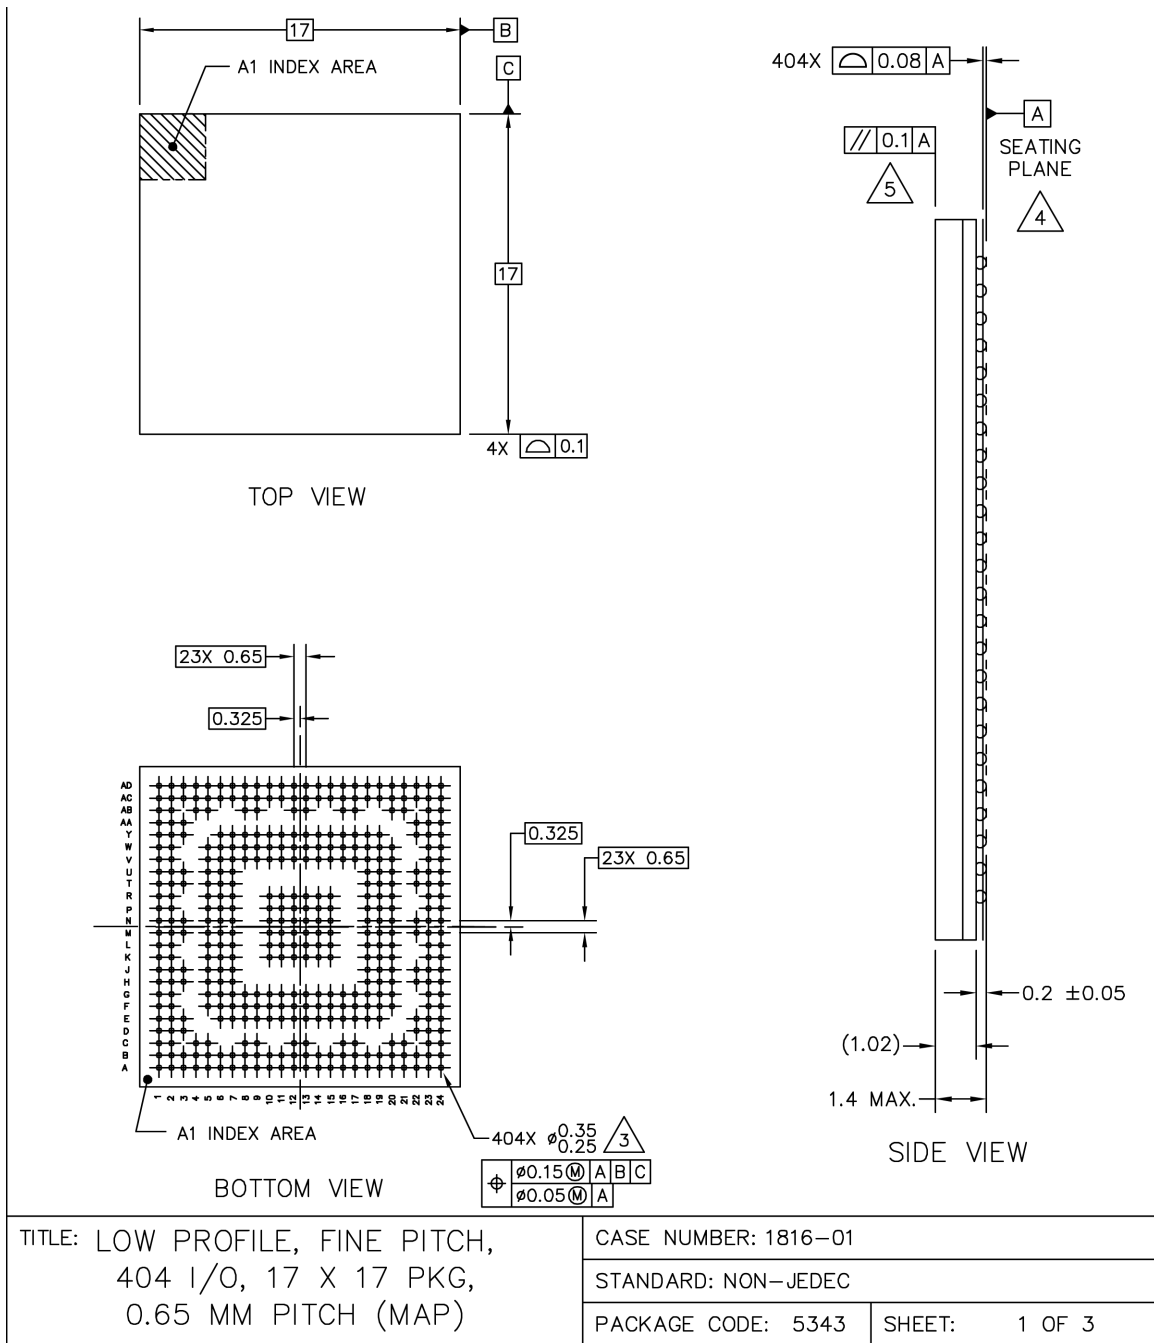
i.MX27 Full Package MAPBGA: Mechanical Drawing
